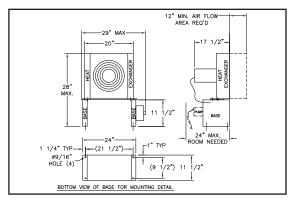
Oil cooler overall dimensions, wt. 150 lbs.
